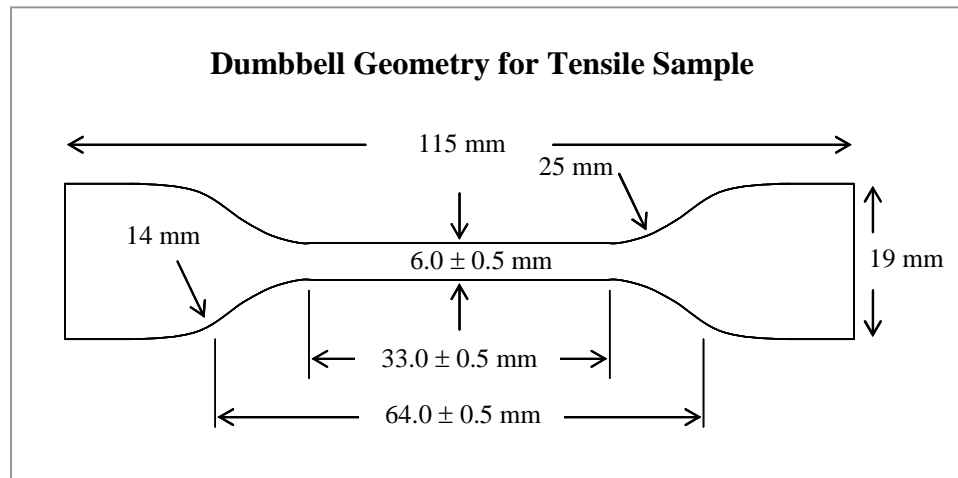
A dumbbell shape with dimensions according to the D638 of the ASTM standard
